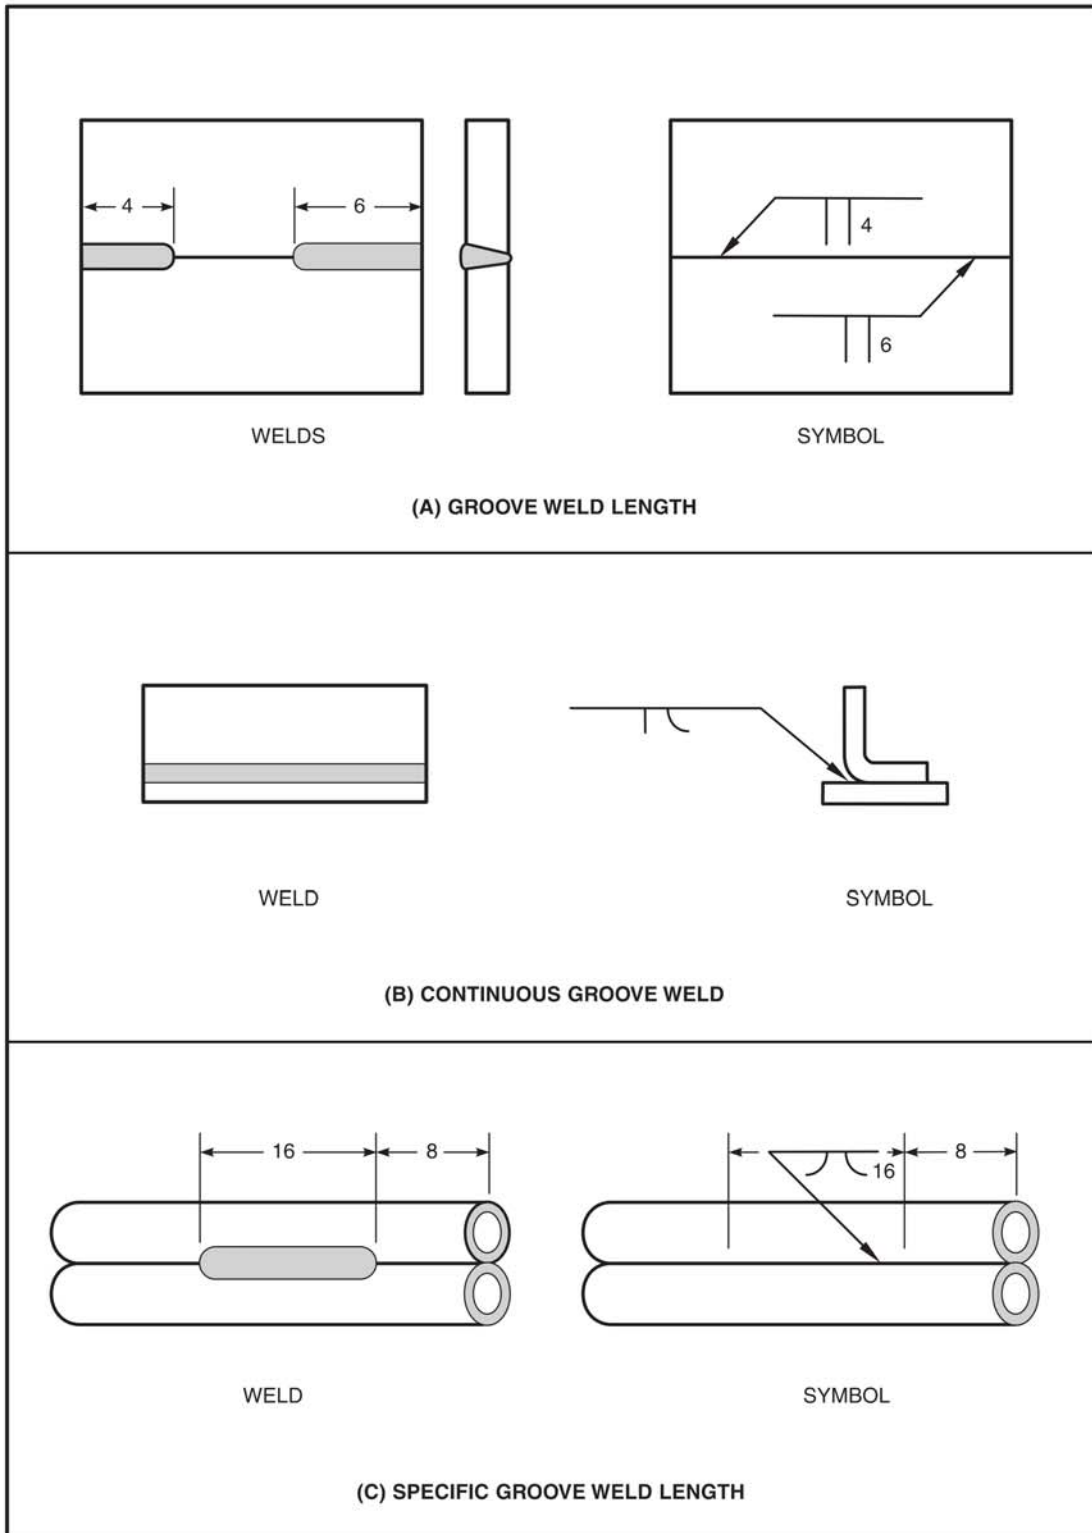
Application of the Weld Length of Groove Welds
